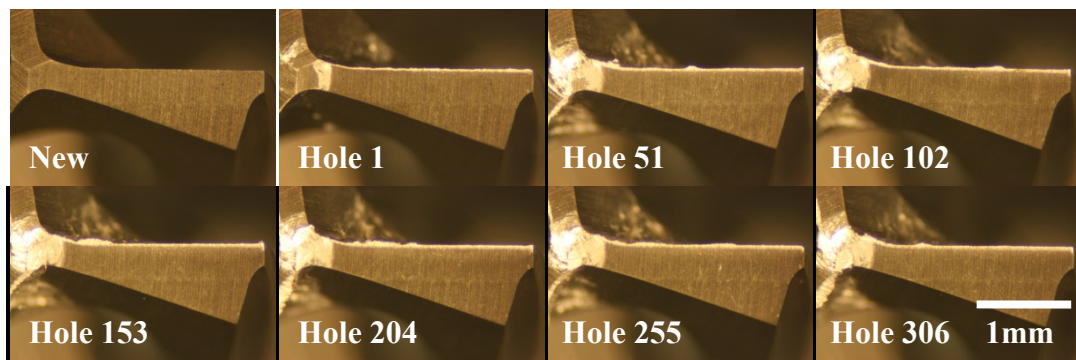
Tool wear micrographs of Dymon-iC™ drill under 70bar cutting fluid, 130m/min cutting speed (Test 11)
